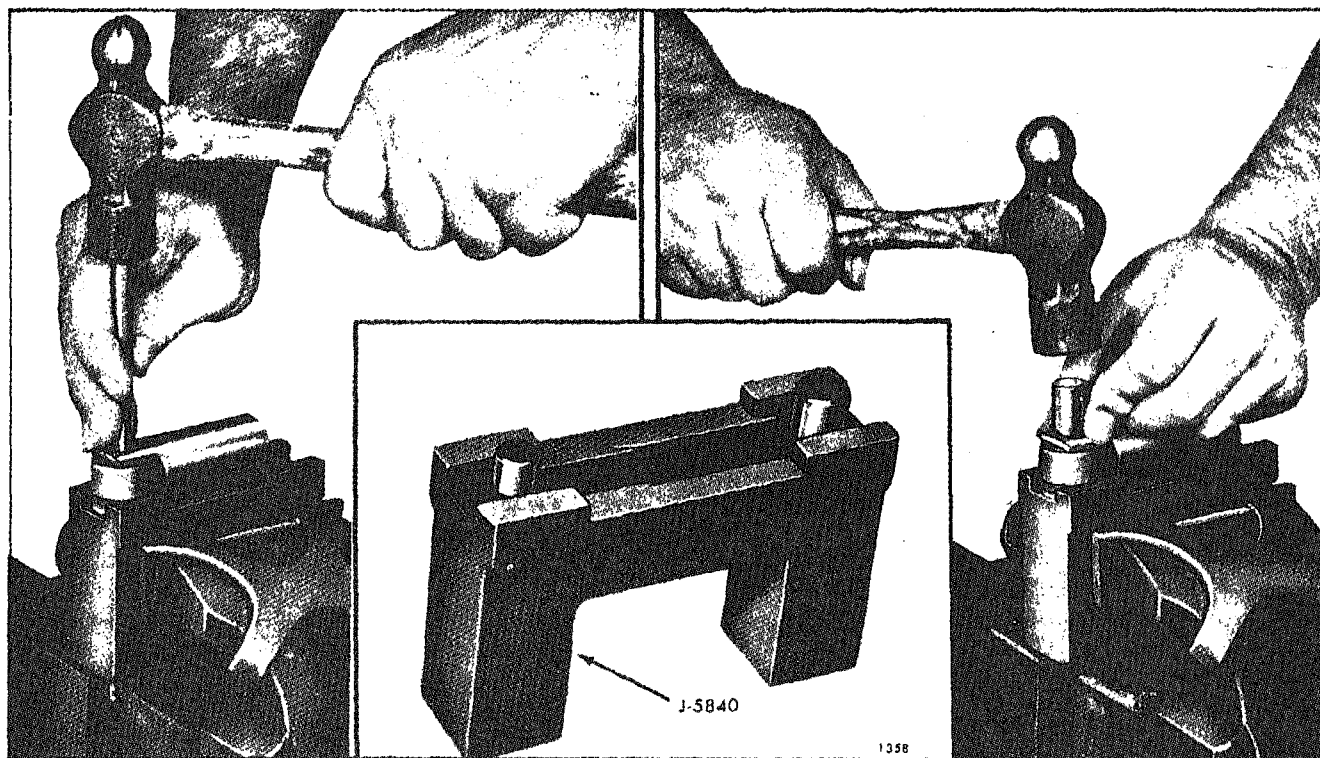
Removing or Installing Cam Follower Roller and Pin with Tool J 5840
